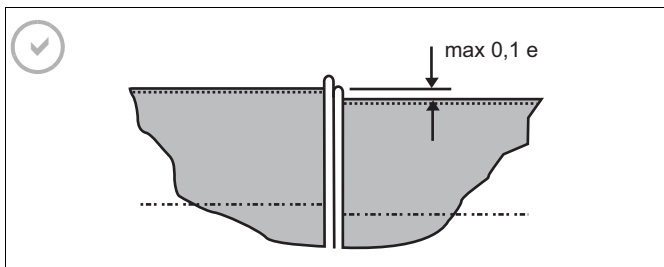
Butt-weld with mis-alignment of pipe (acceptable)
